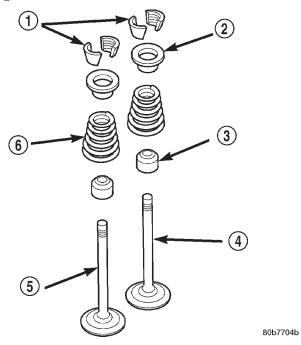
Valve and Keeper Configuration 4.0L Engine
